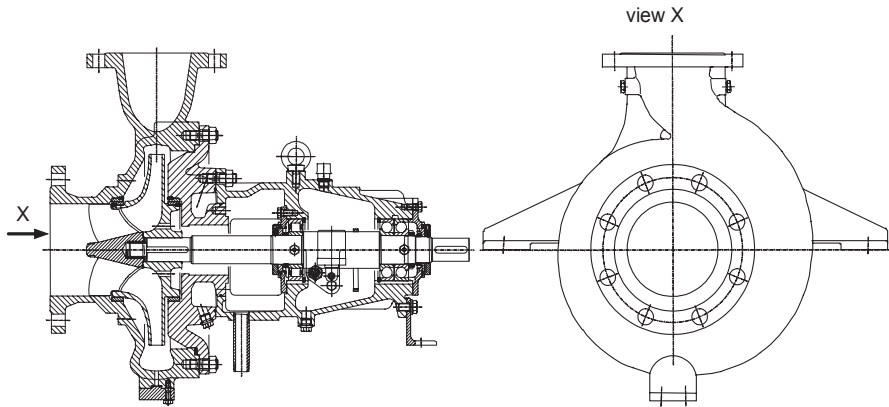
Single-stage volute pump with bearing frame, Sulzer pumps
